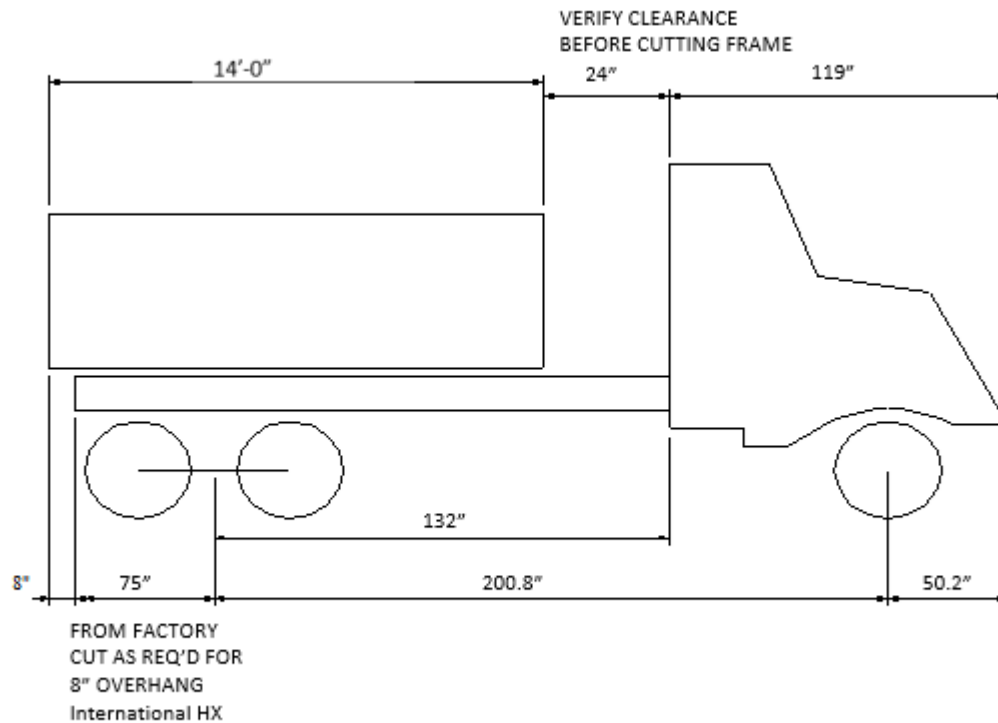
Typical Tandem Axle Truck Dimensions with Set Back Front Axle
